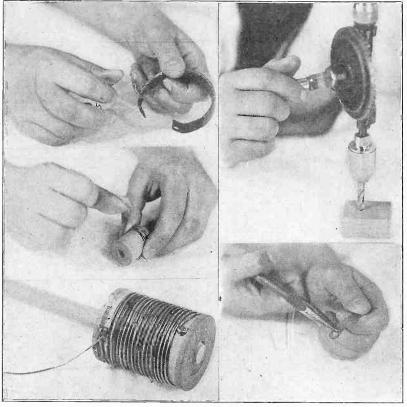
, top left, removing resistance wire from an old rheostat. Fig. 2, on an ordinary spool wind this wire. The completed winding is shown in Fig. 3, bottom left. Cut a block of wood I" thick and 2" square (Fig. 4, top right). Drill a ¼" hole, to insert a dowel stick, take an old switch arm, bend it back a little. See Fig. 5. (Hayden).
